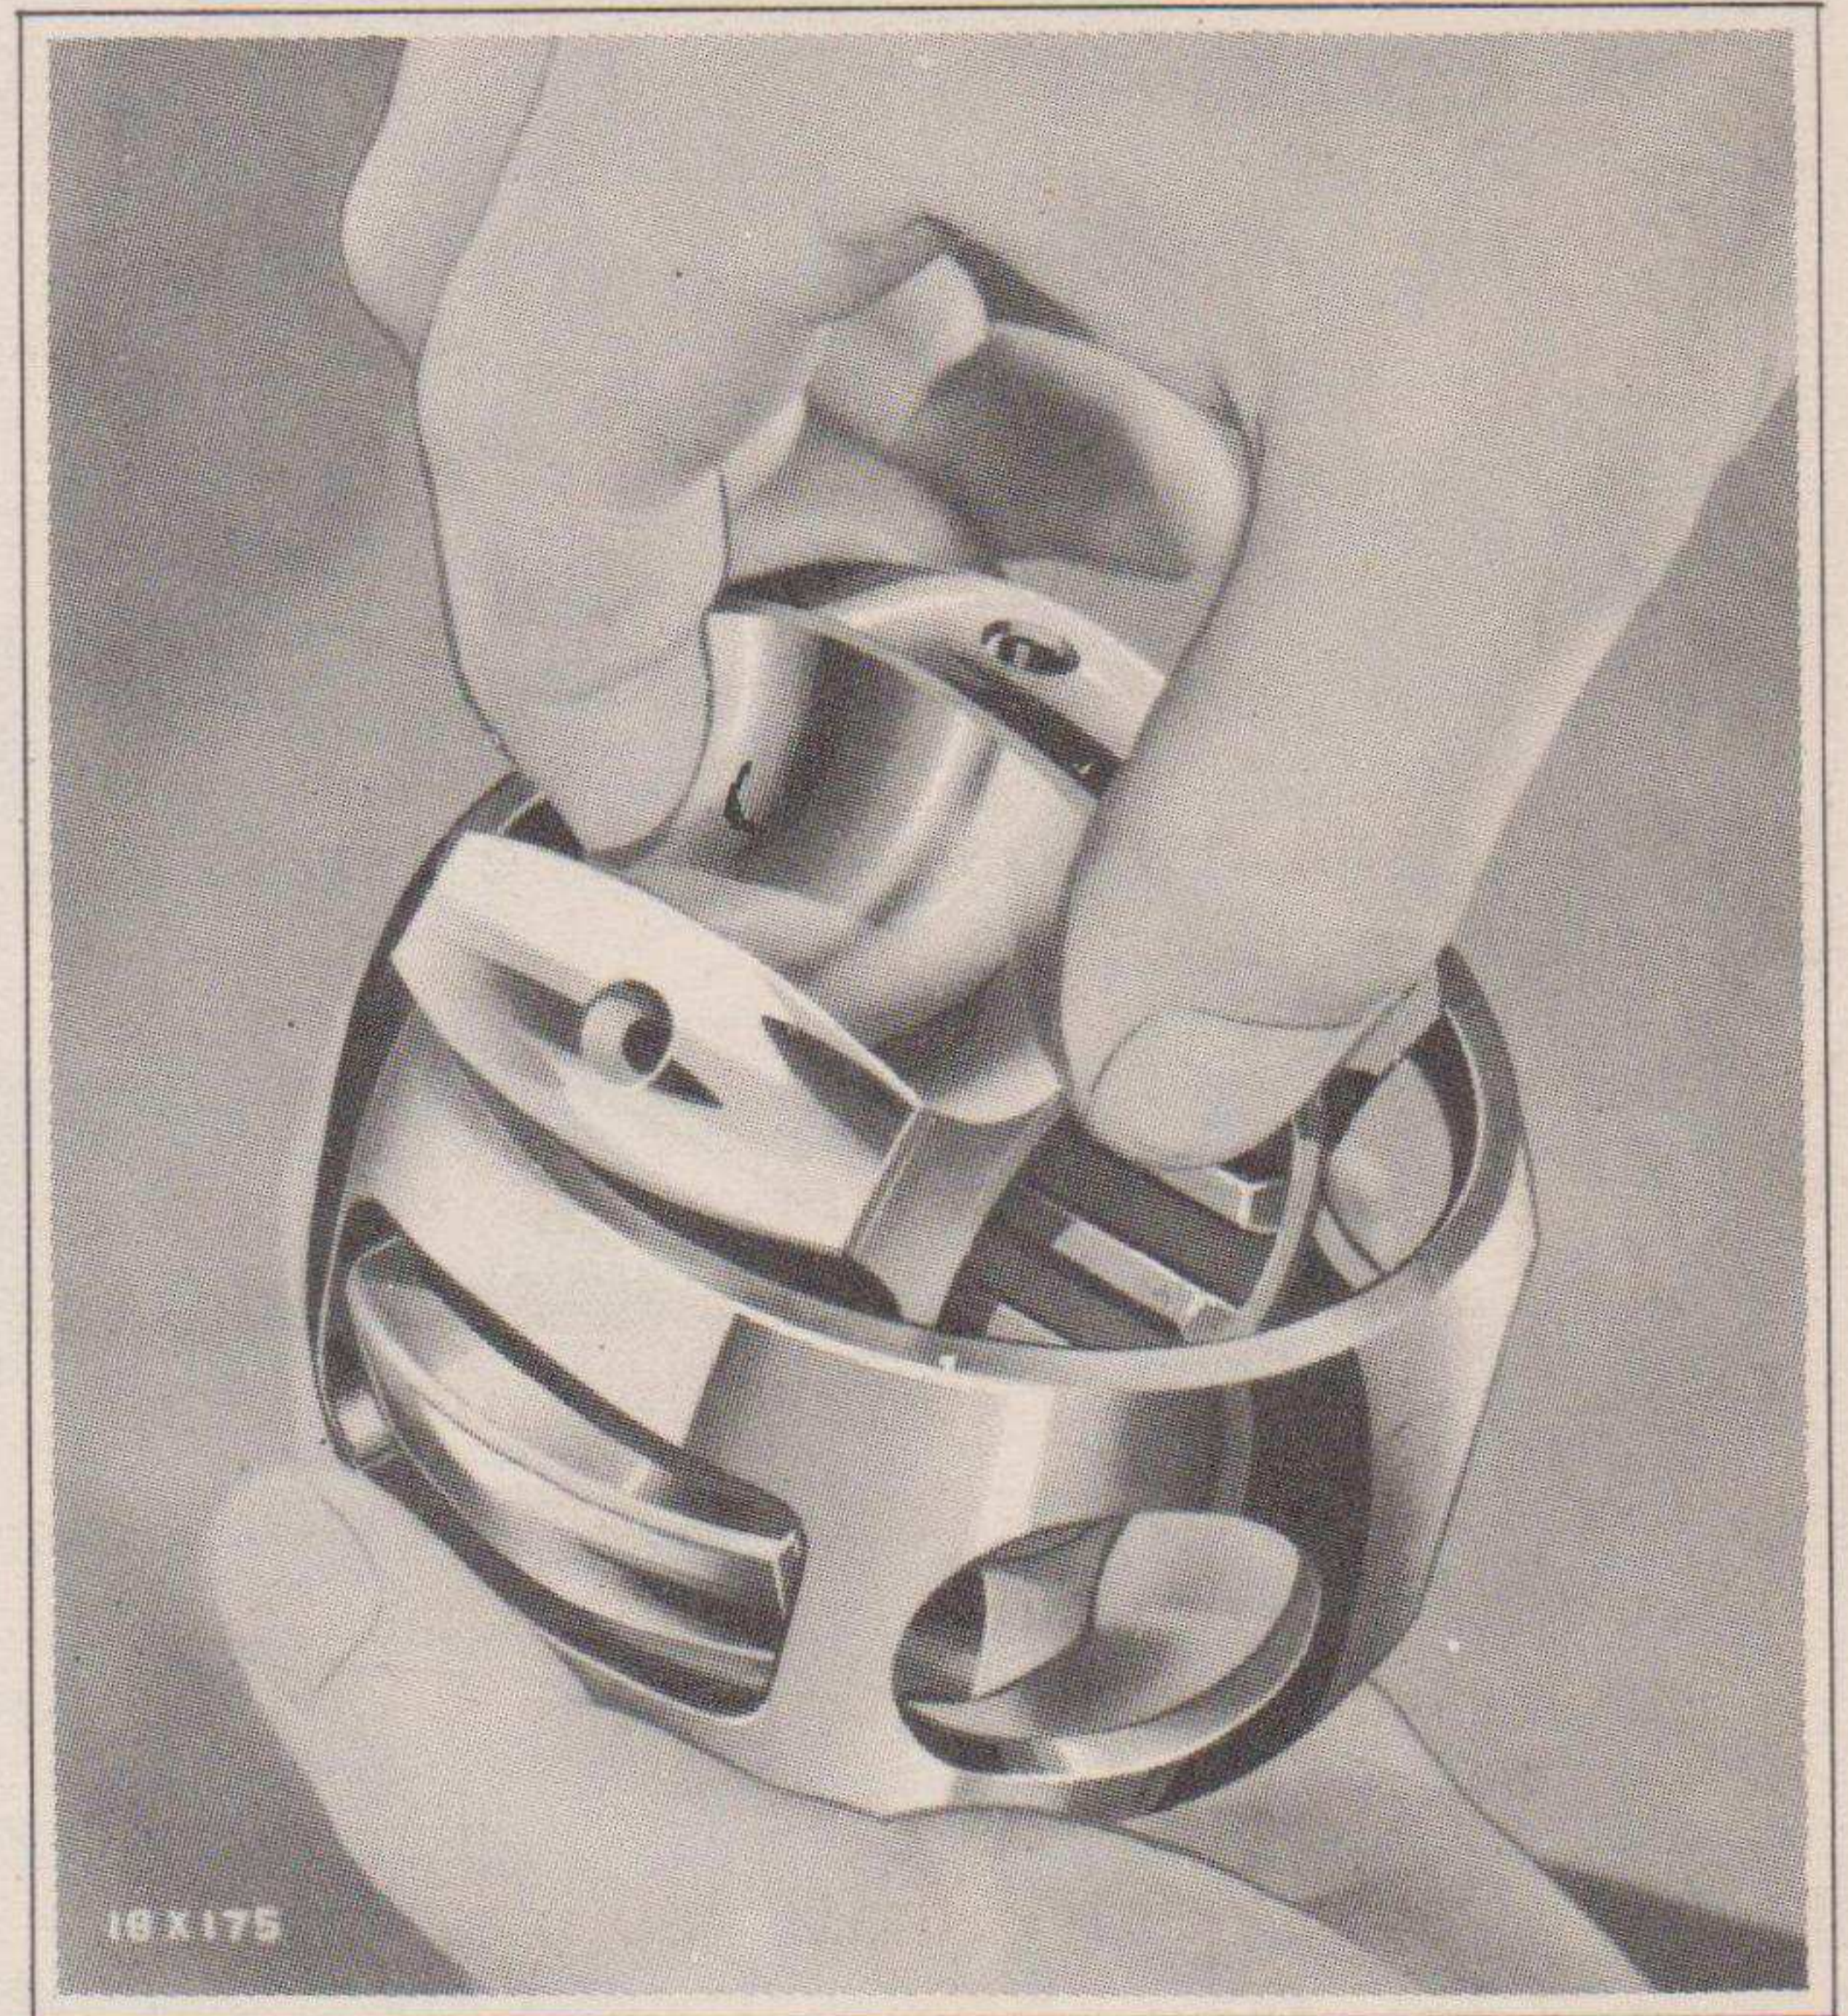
Removing Universal Drive Inner Race from Ball Cage (Rzeppa)
